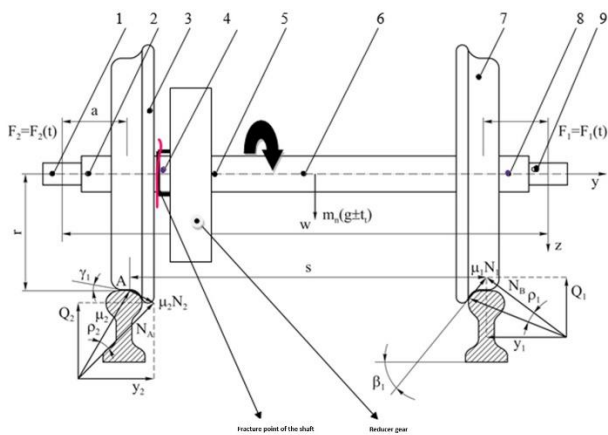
Measurement locations of residual stresses in the shaft after fracture
